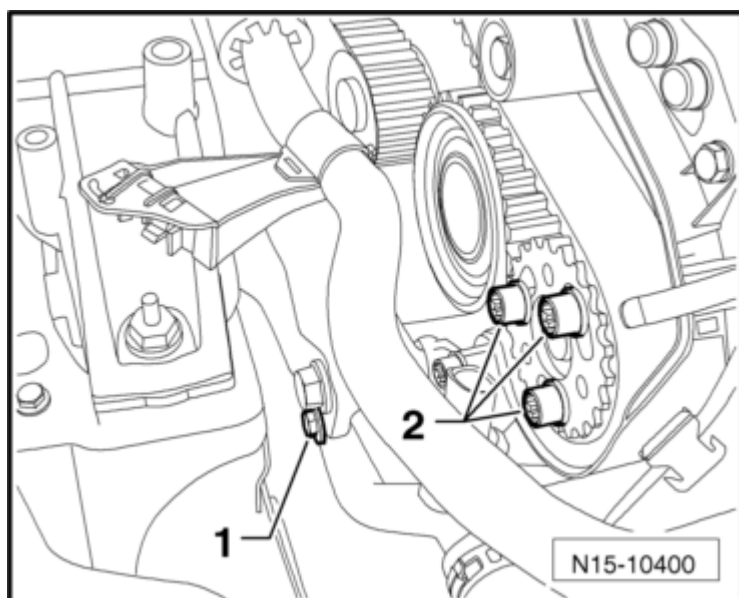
Identifying Coolant Pipe Bolt -1- And High Pressure Fuel Pump Toothed Belt Gear -2-
